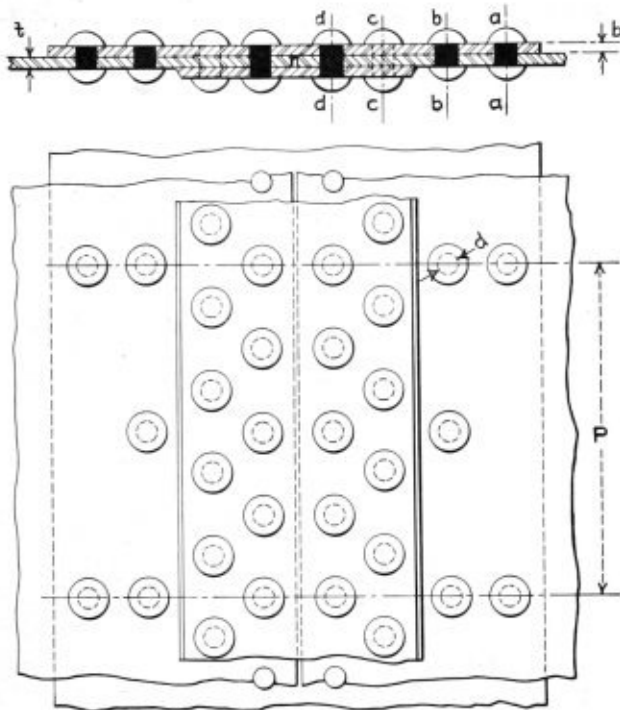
Quadruple Riveted Double Butt Strap Joint
